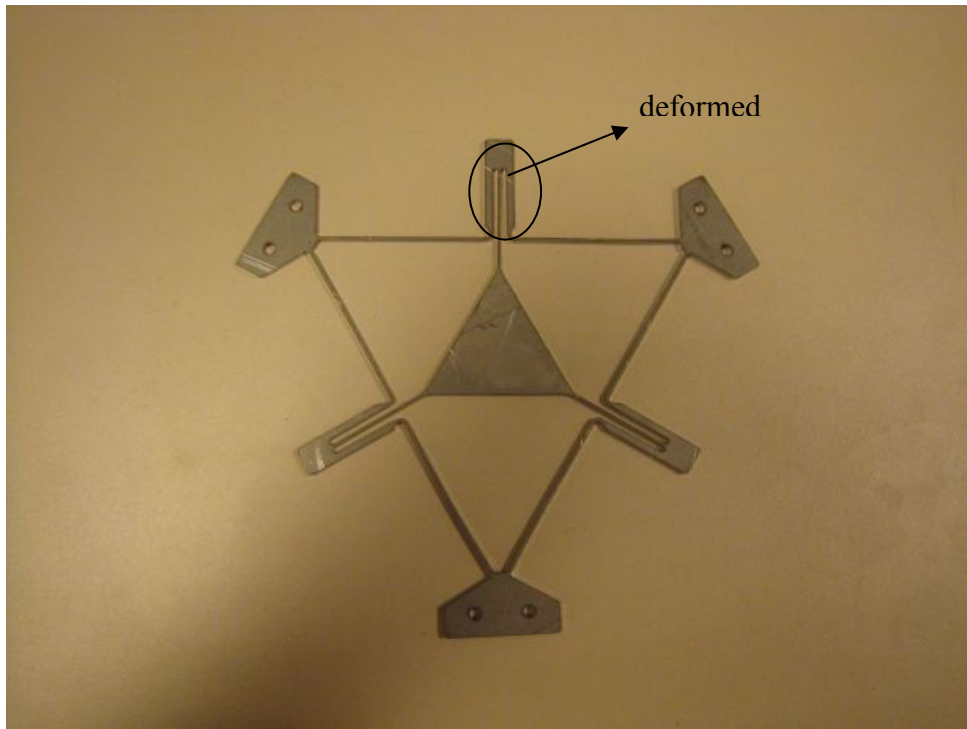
Stainless steel laser cutting manufactured compliant mechanism
